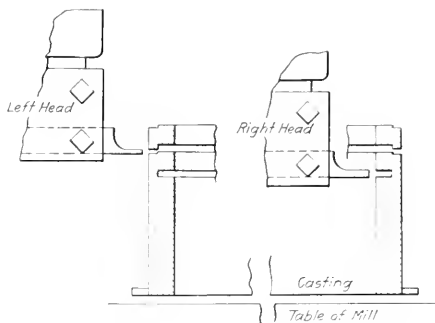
Method of Cutting Off Z-Shaped Packing Rings for Piston Valves
